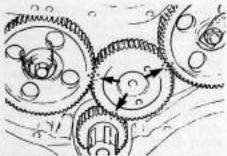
View showing timing gears in proper meshed positions on six cylinder engines.
